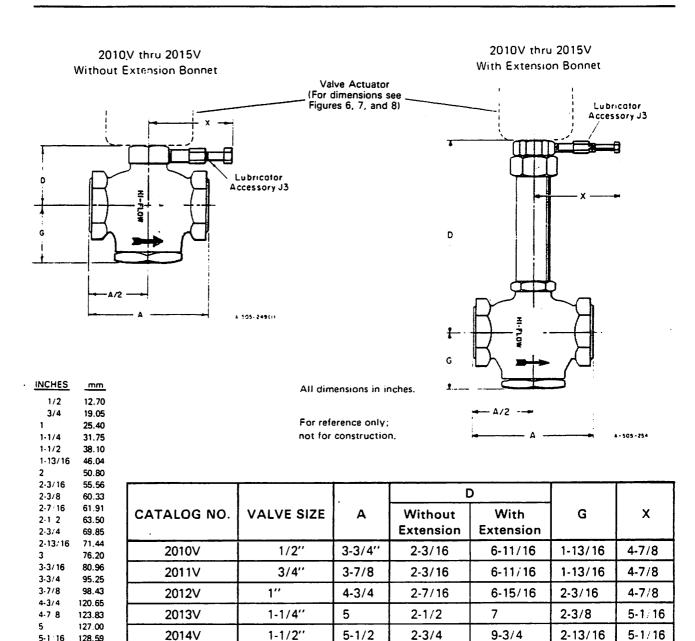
Mounting Dimensions for 2010V thru 2015V Hi-Flow Valves
